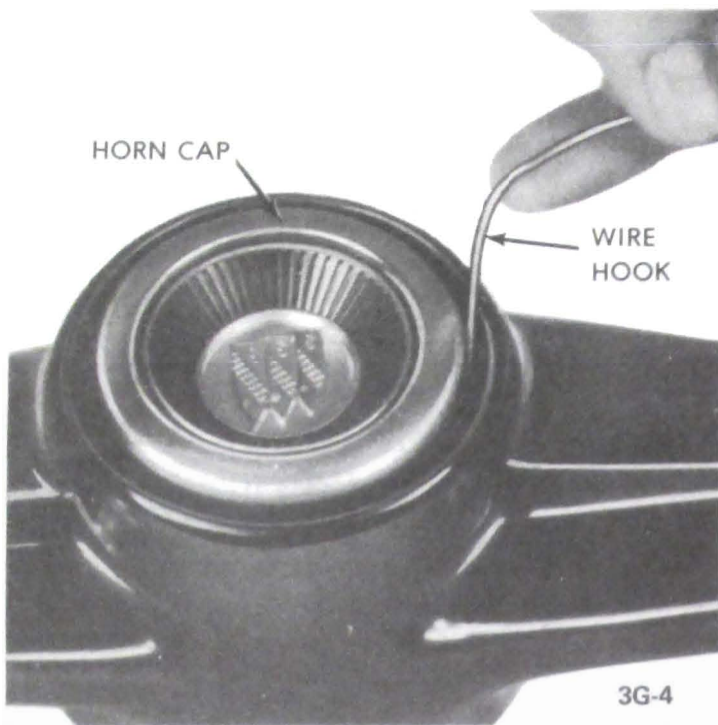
G-4 Horn Actuator Cap Removal - Standard Steering Wheel
